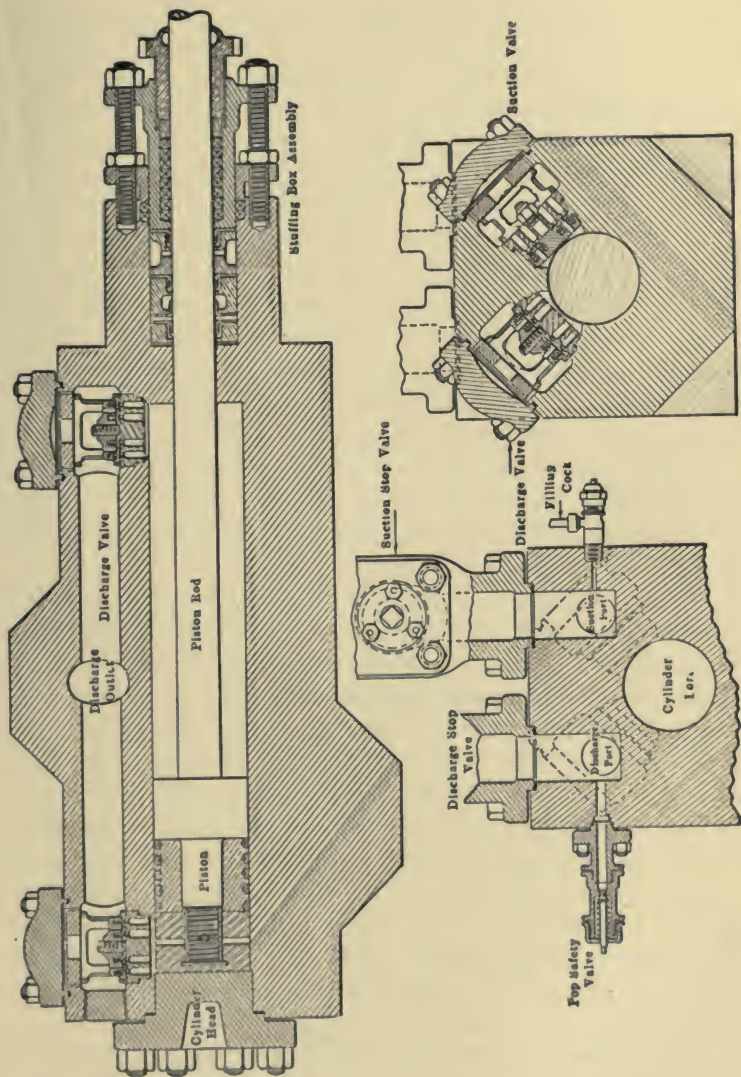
Wittenmeier carbon dioxide compressor showing plate valves.
